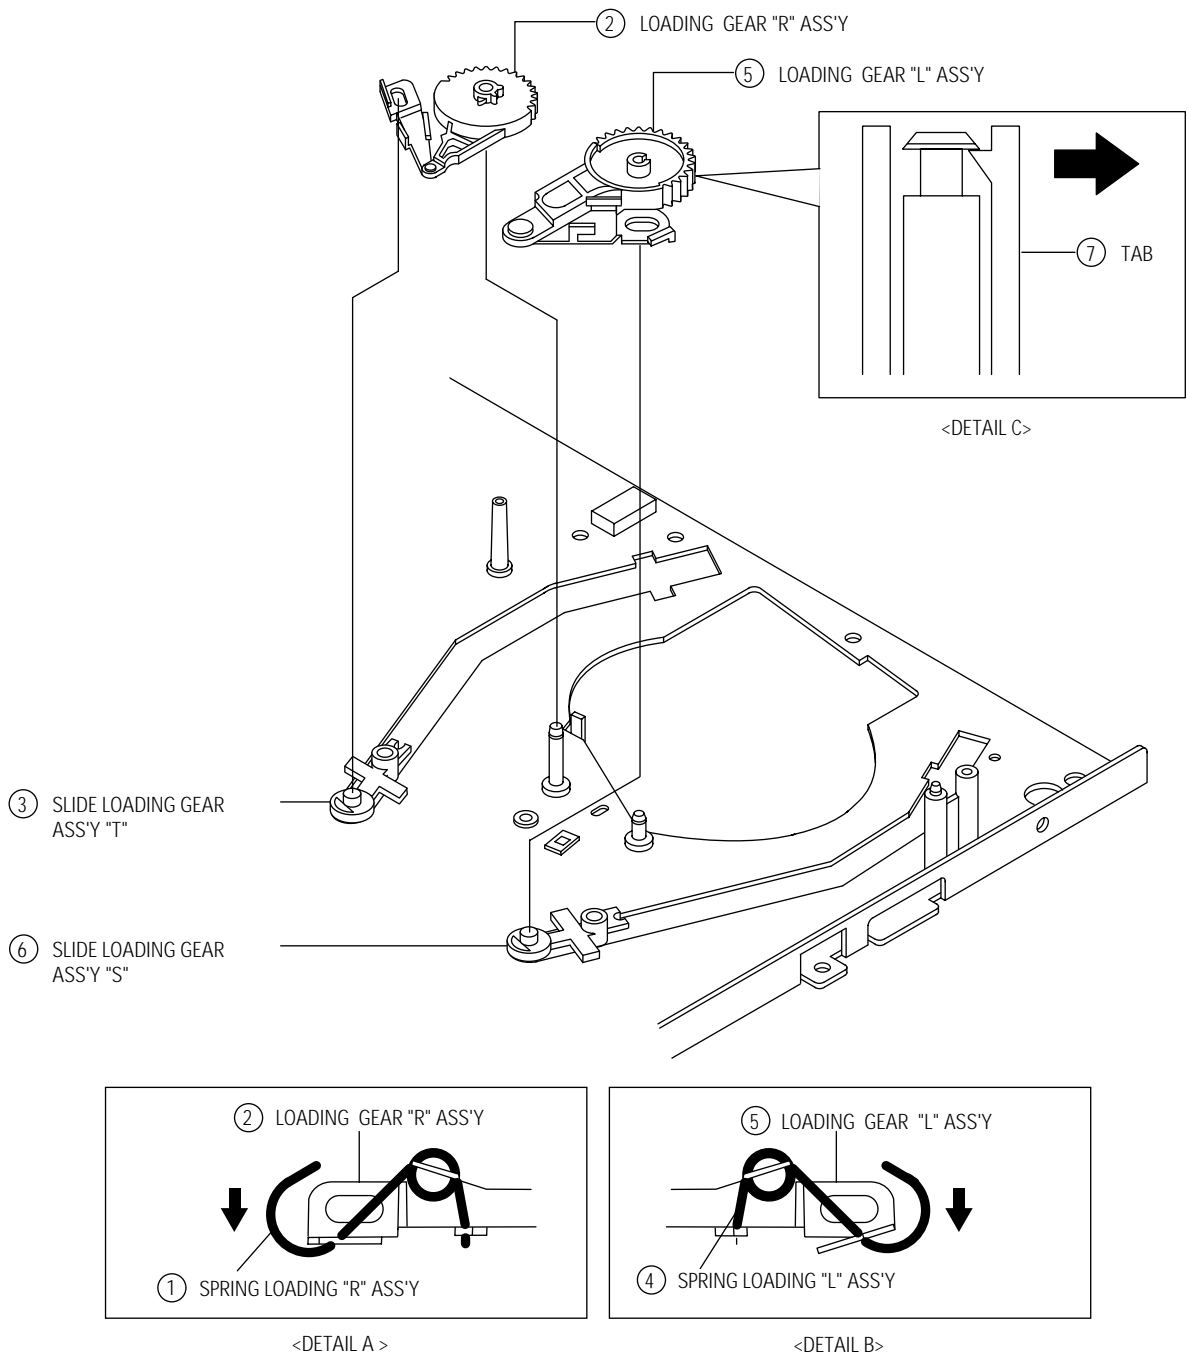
Loading Gear "L" , "R" Ass'y Removal
